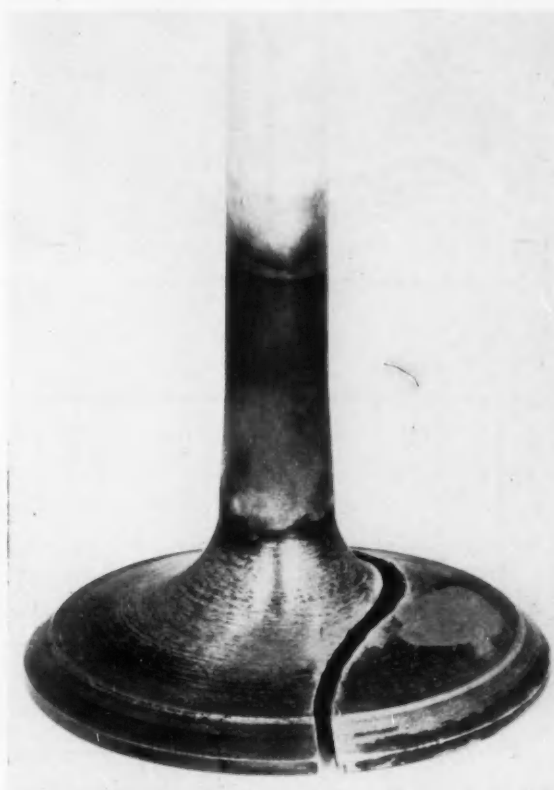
Valve breakage due to impact fatigue usually takes place where stress raisers act as nuclei for the valve failure
